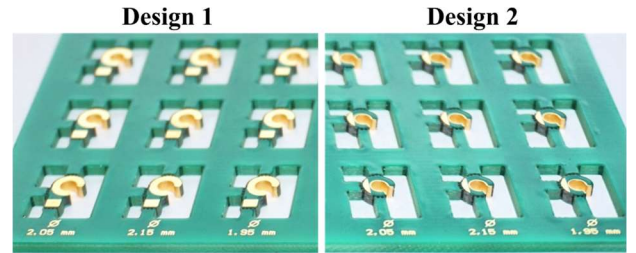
Layout of the PCB needle holder panel. Two different geometric designs are shown, with three different hole sizes.
